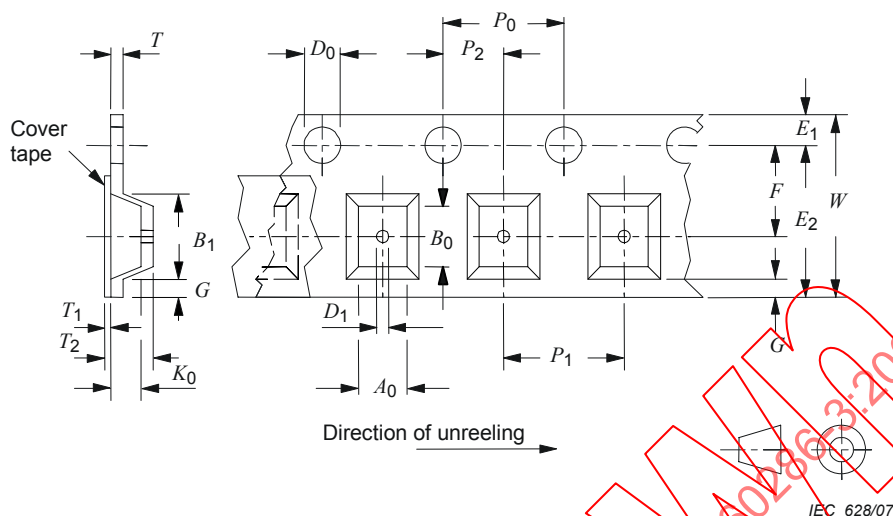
Blister carrier tape dimensions (8 mm, 12 mm, 16 mm and 24 mm)
